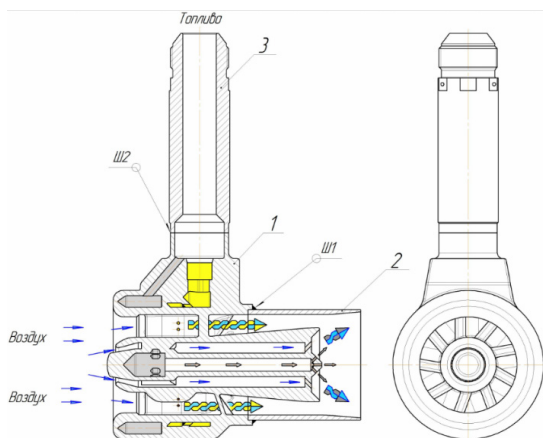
The design of the assembly unit “Burner device”, optimized for the SLM method
